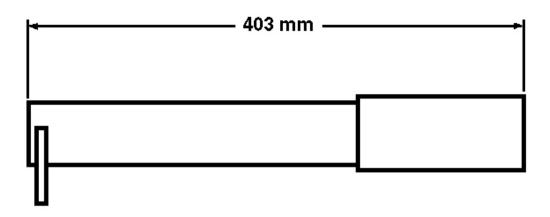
Measuring The Distance From Lower Edge Of Upper Jacket (Telescoping) Courtesy of GENERAL MOTORS CORP.
